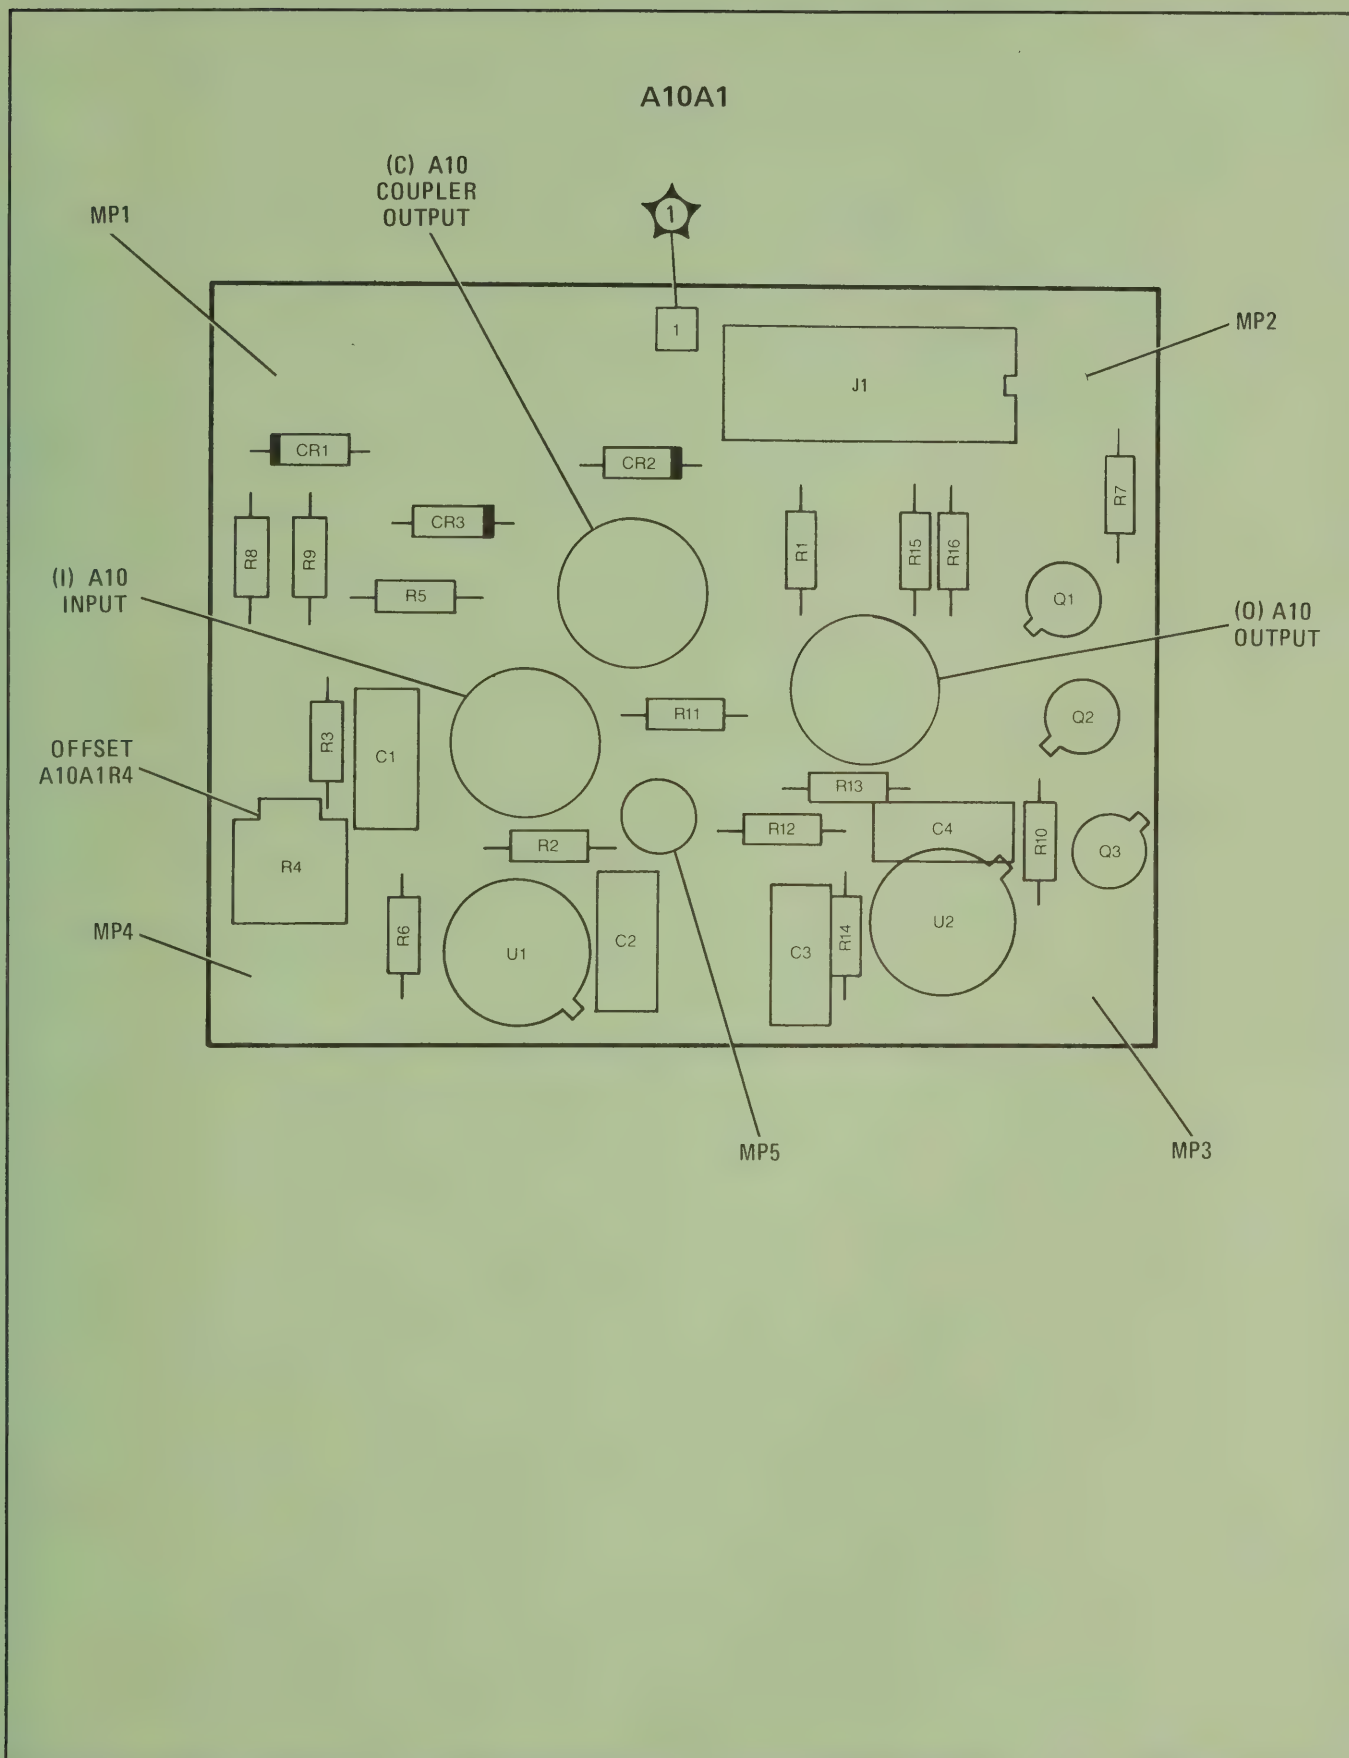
A10A1 YTM Bias Control Assembly, Component Locations (CHANGE K)
